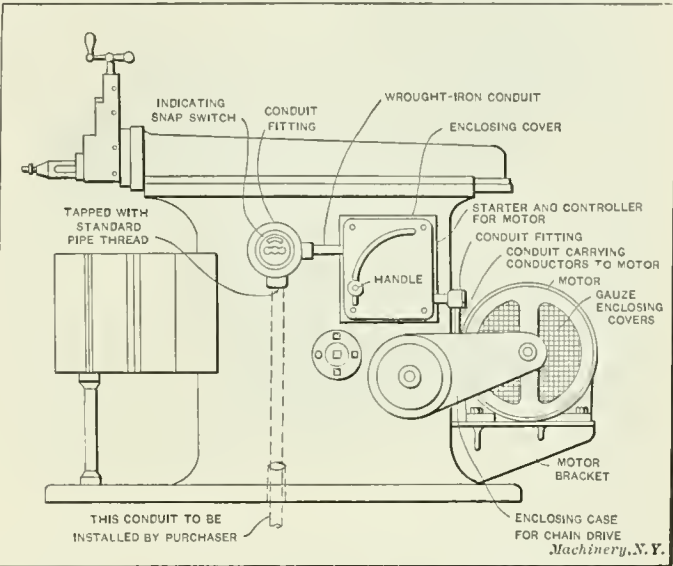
A Motor-driven Shaper with Completely Enclosed Wiring
